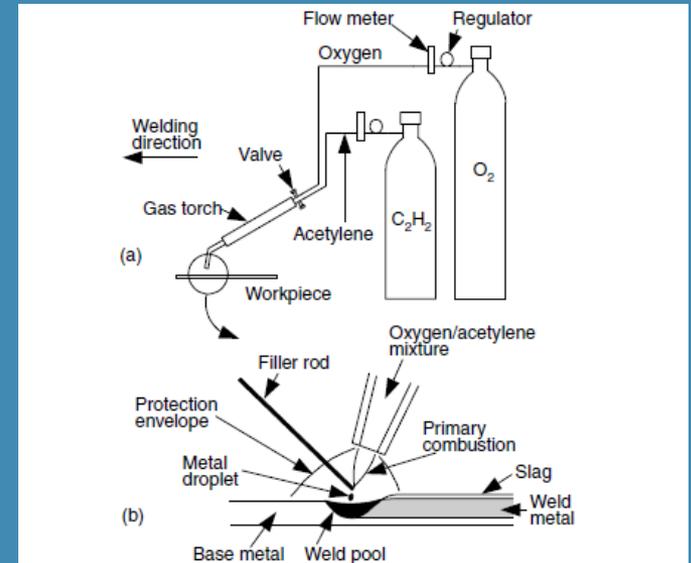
Oxyacetylene welding: (a) overall process; (b) welding area enlarged.
